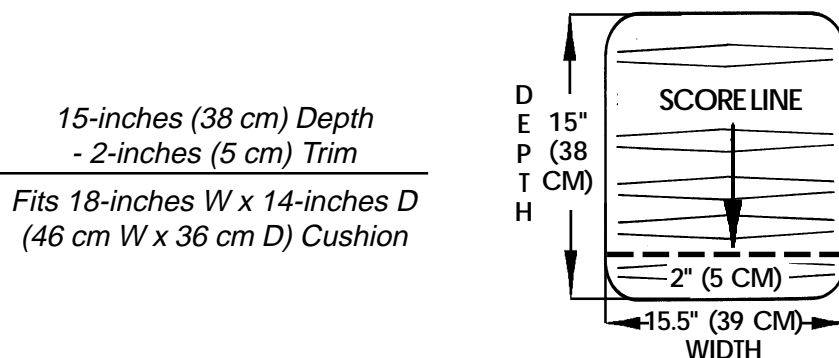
CUSTOMIZING THE SEAT RIGIDIZER - SAMPLE TRIM LINES AND DIMENSIONS
